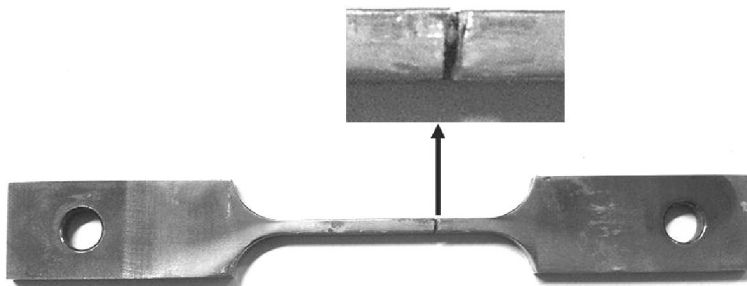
Fractured site of a fretting fatigue test specimen.
